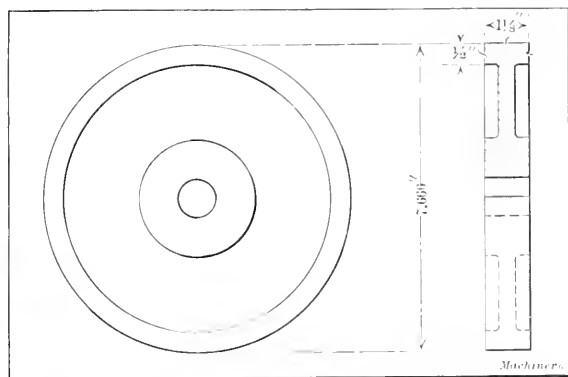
Cast-iron Gear Blank machined as indicated at the Rate of Sixty-two in Ten hours with a Stellite Tool
